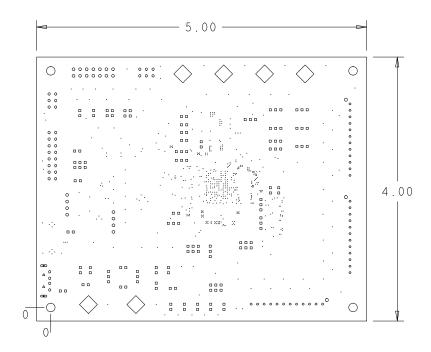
KIT34708VMEVBE (Rev. B) Bottom Layout Layer
